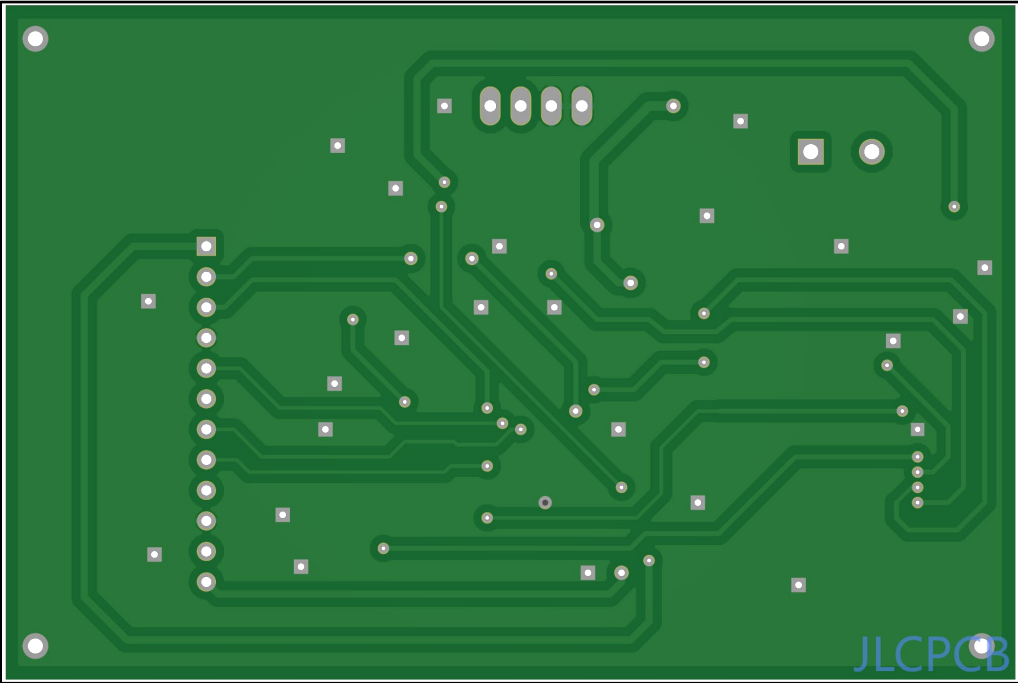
Custom PCB JLC PCB Rendering (Bottom)
